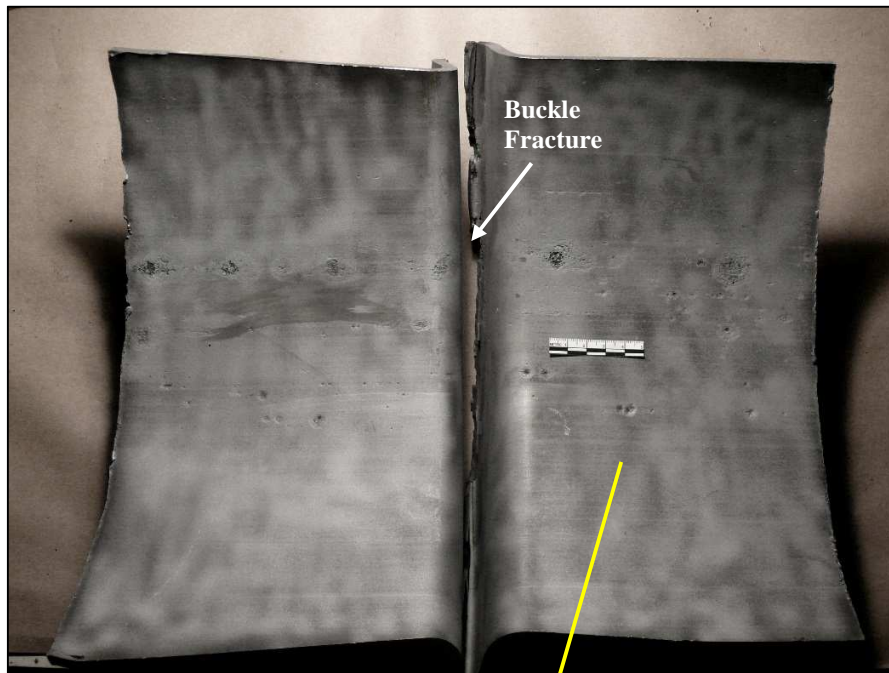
DEGREASED FRACTURE SURFACES
